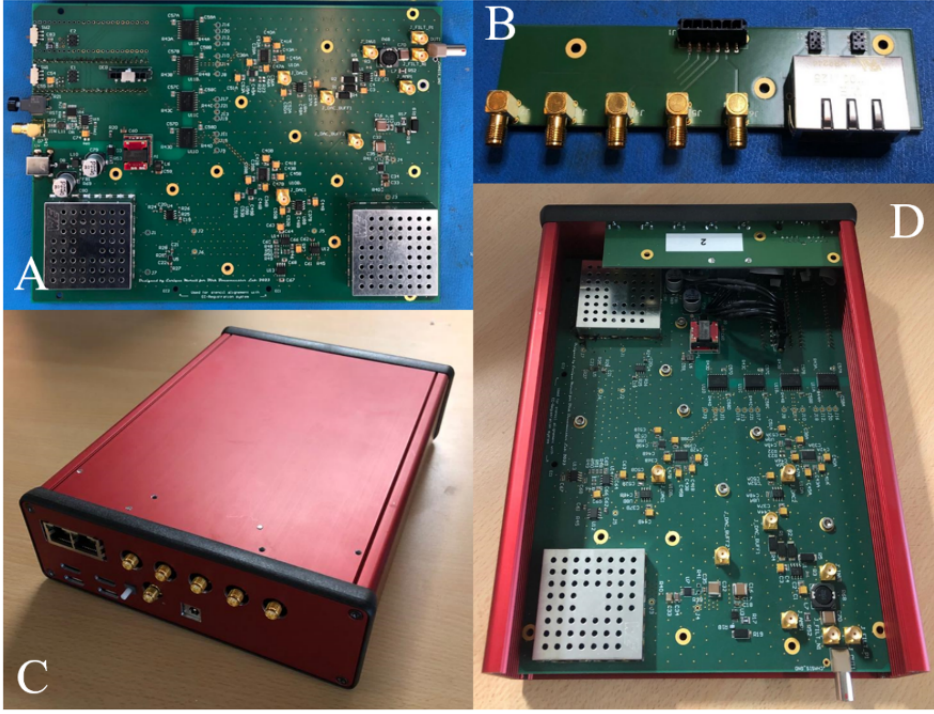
Photographs of the assembled lockbox based on the V2 PCB design by Enrique Morell.
